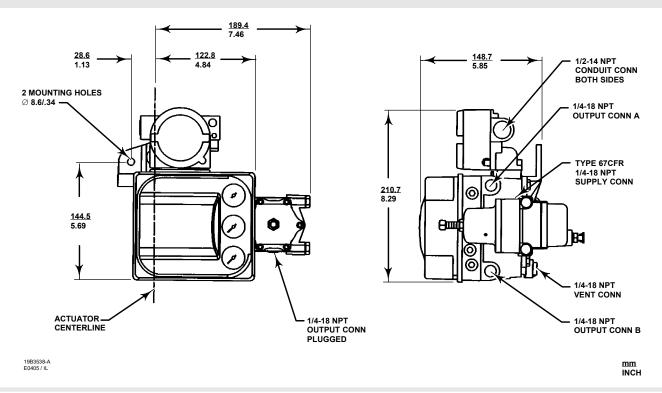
Dimensions for Type DVC6010 Digital Valve Controller with Integrally Mounted Filter Regulator
